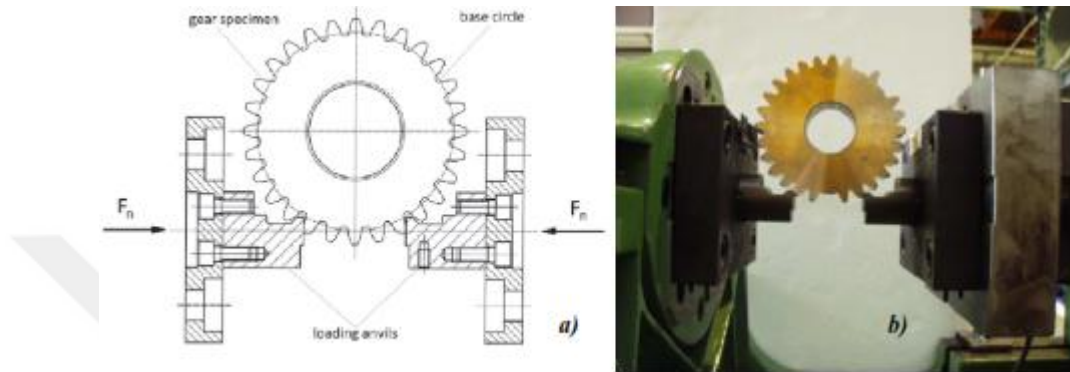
a) Gear specimen mounted on the test rig. b) Gear specimen mounted in the clamping system.
